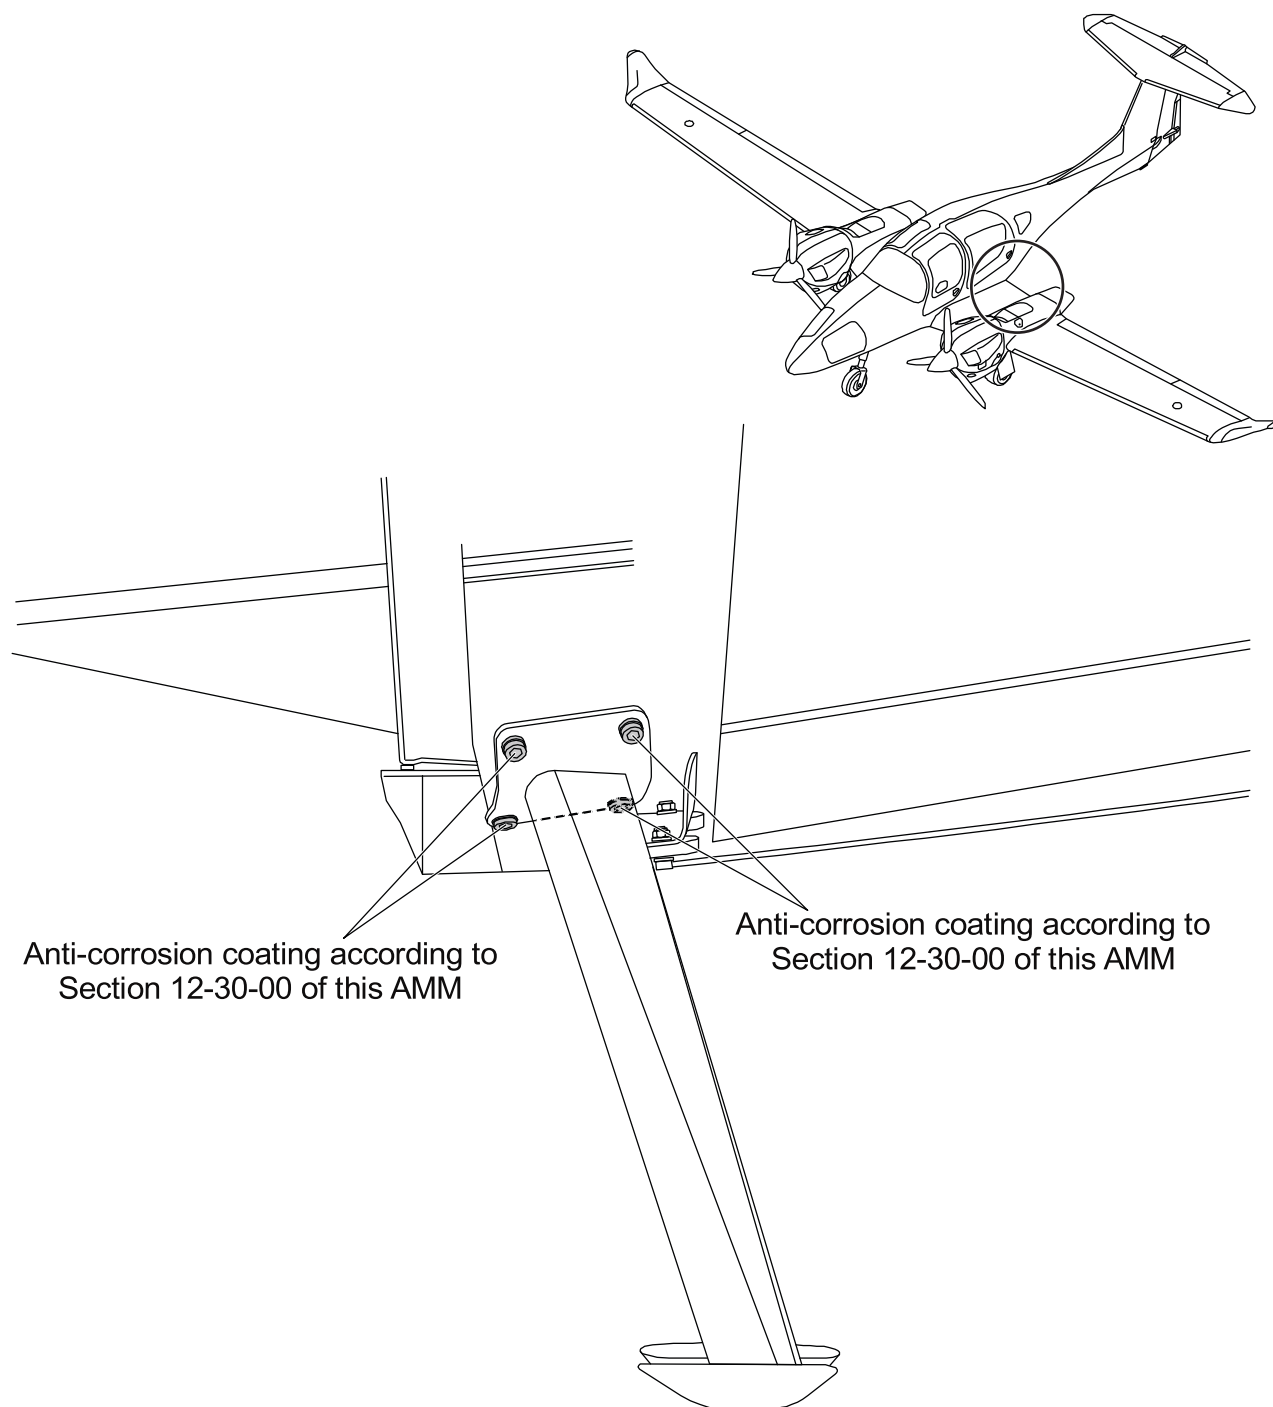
Anti-Corrosion Coating - Foot Step Screws
